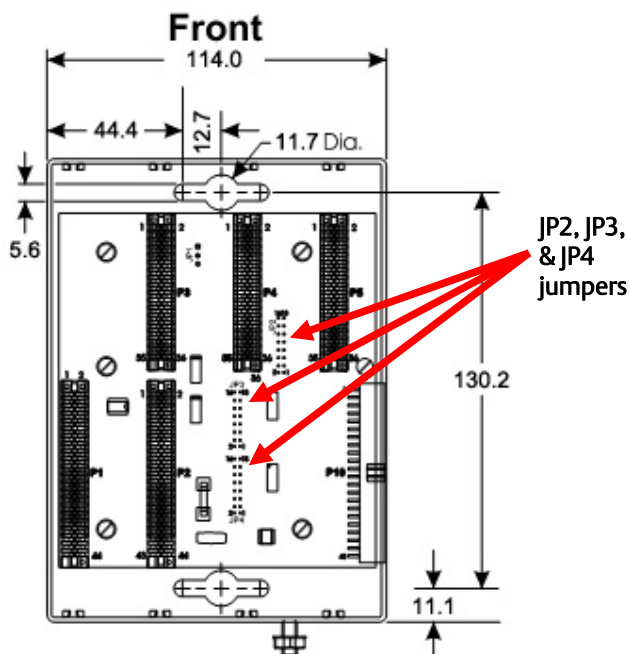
ControlWave Micro 4-Slot Base Housing Dimensions (in millimeters)
